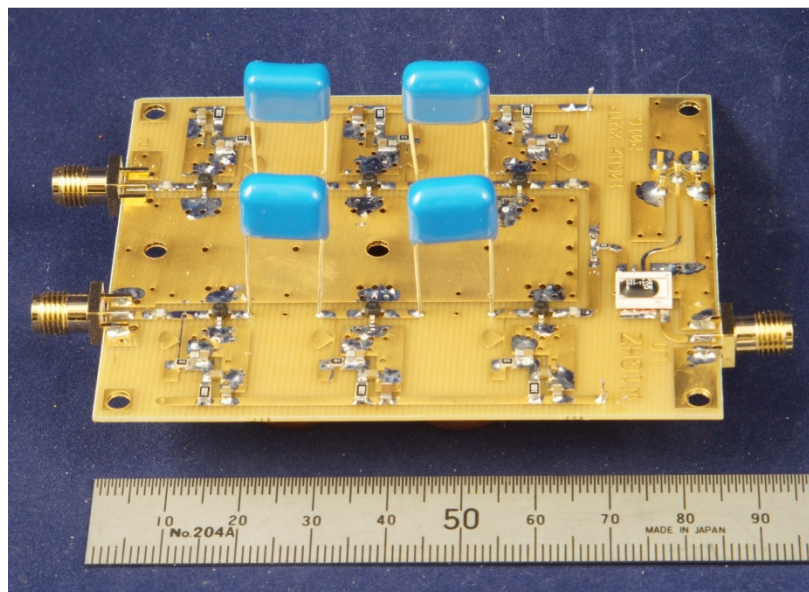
Capacitors with perfect lead spacing make probe assembly easier
